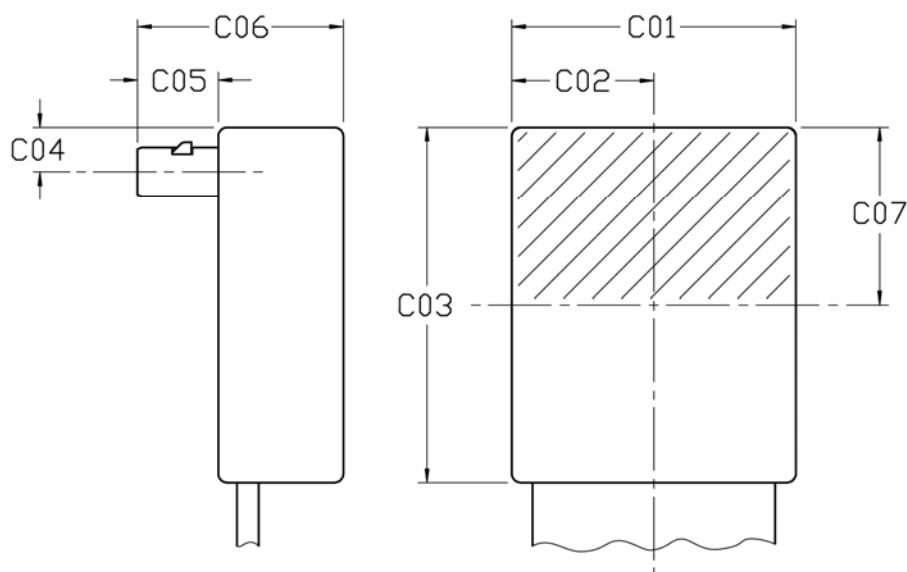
RIGHT ANGLE CABLE EXIT INTERNAL CABLE ASSEMBLY
